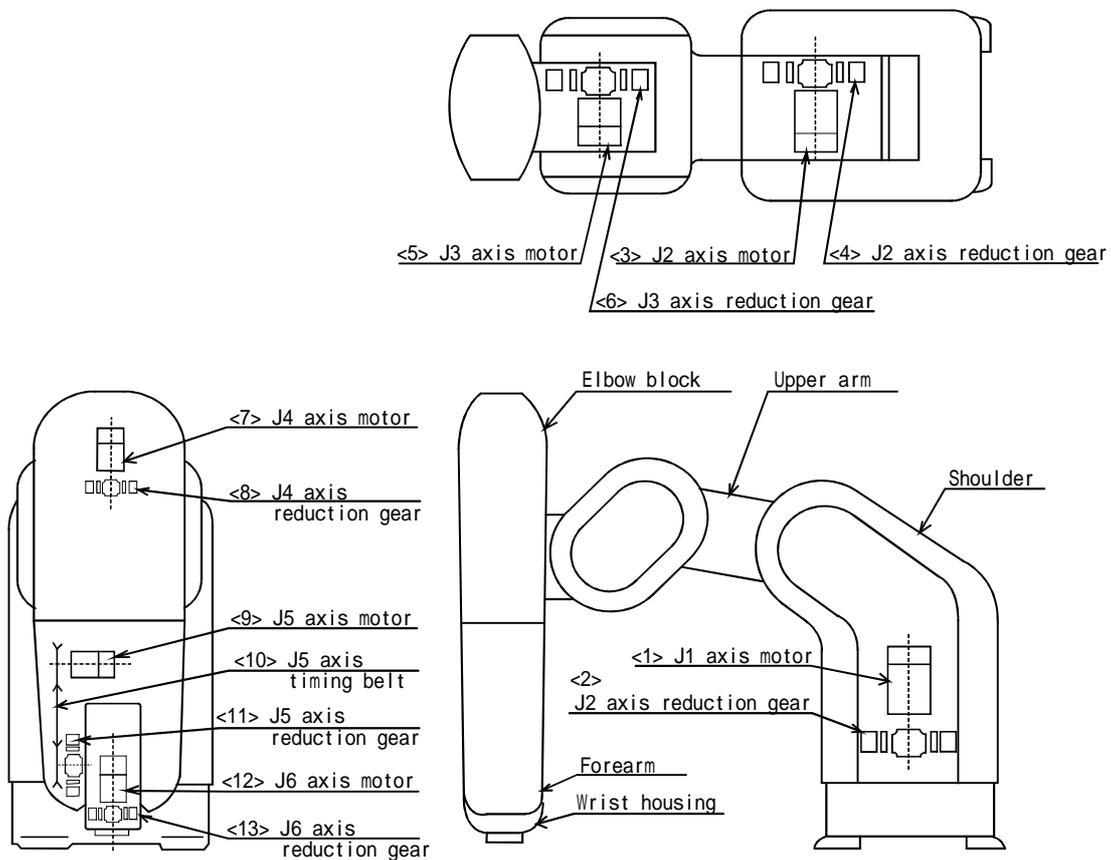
Outline structure drawing of robot arm (6-axis type)
